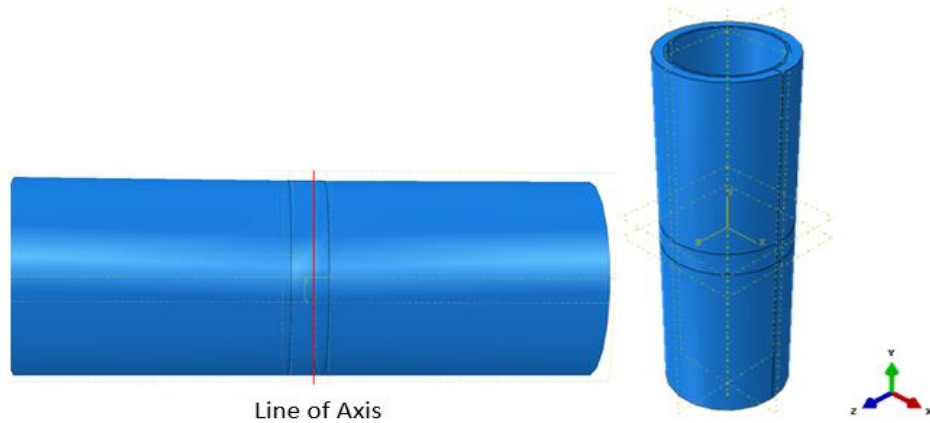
Geometry and (a) weld line of Full Pipe Model and (b) clad section of pipe
